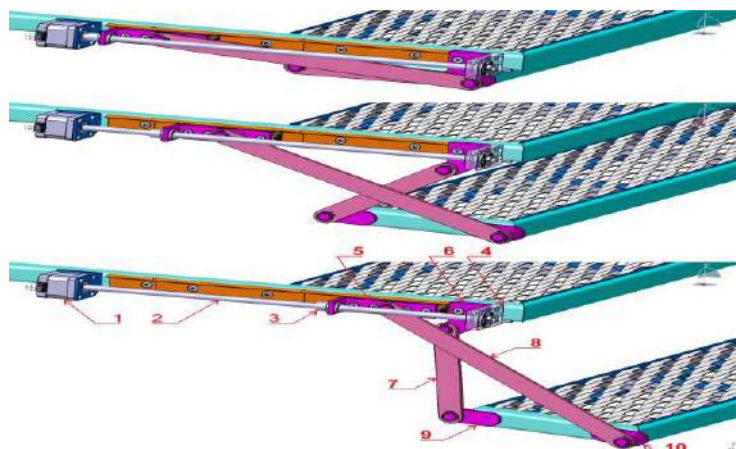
Linear guide ensuring the extension of the upper step
